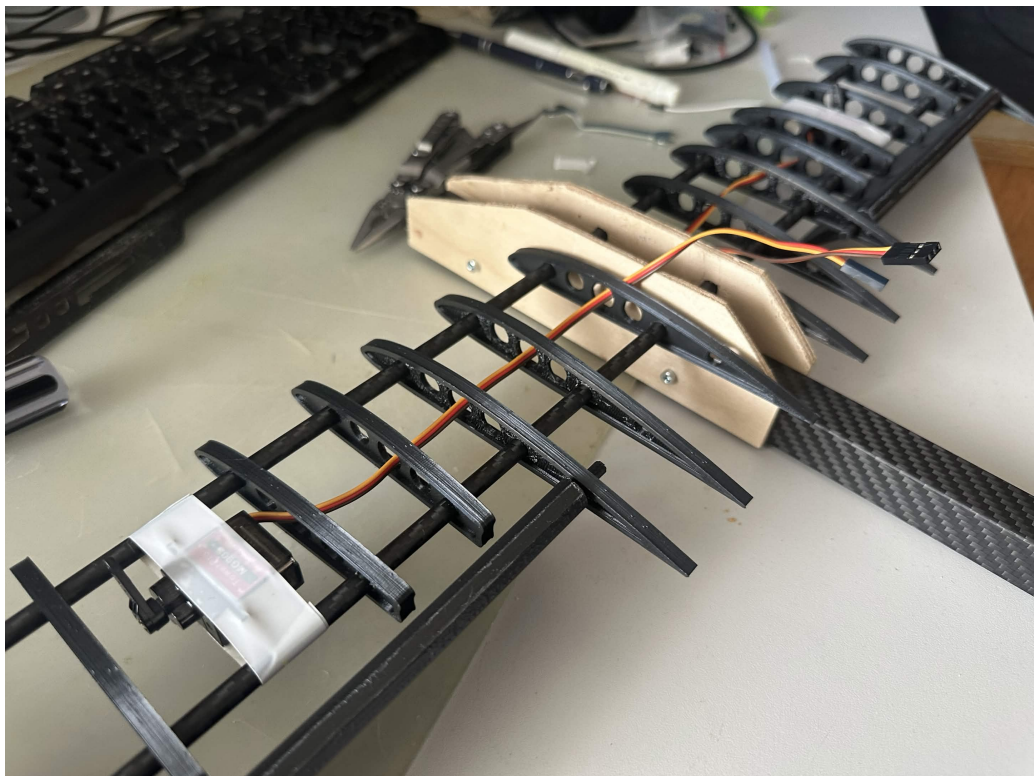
The assembled main wing with 3D-printed ribs, carbon spars and integrated cabling.
